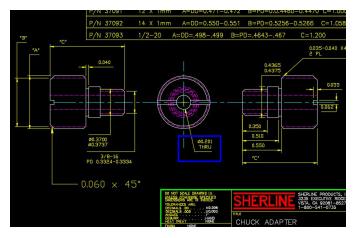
The blue box indicates the new drill-through hole for the Sherline Rotary Table-to-Chuck Adapter.
